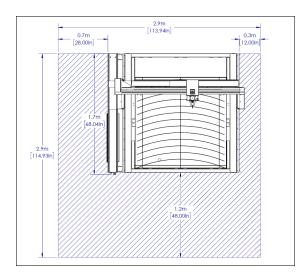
Dimensions of the machine and it's required added space, as viewed from above.
